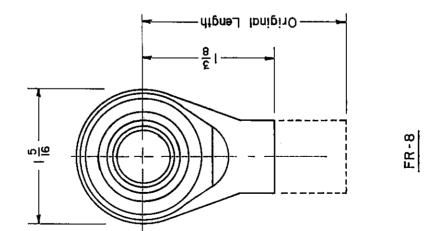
A. Upper Yoke For Ball - Joint Rod End.
